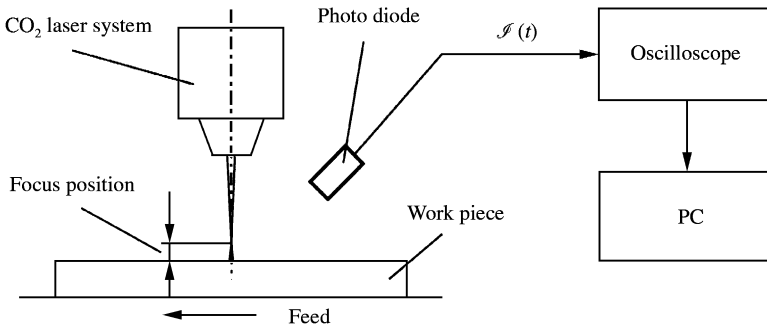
Experimental set-up for CO₂-laser-beam welding.
